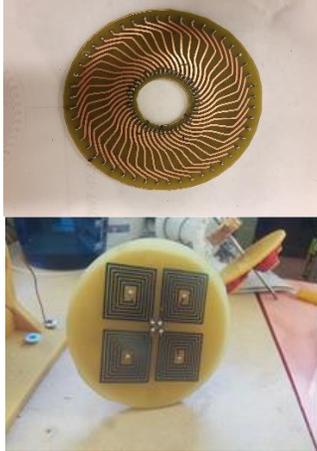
Photolithographically-printed wire coils (a) traditional pancake motor design; (b) our design to reduce solder point requirements
